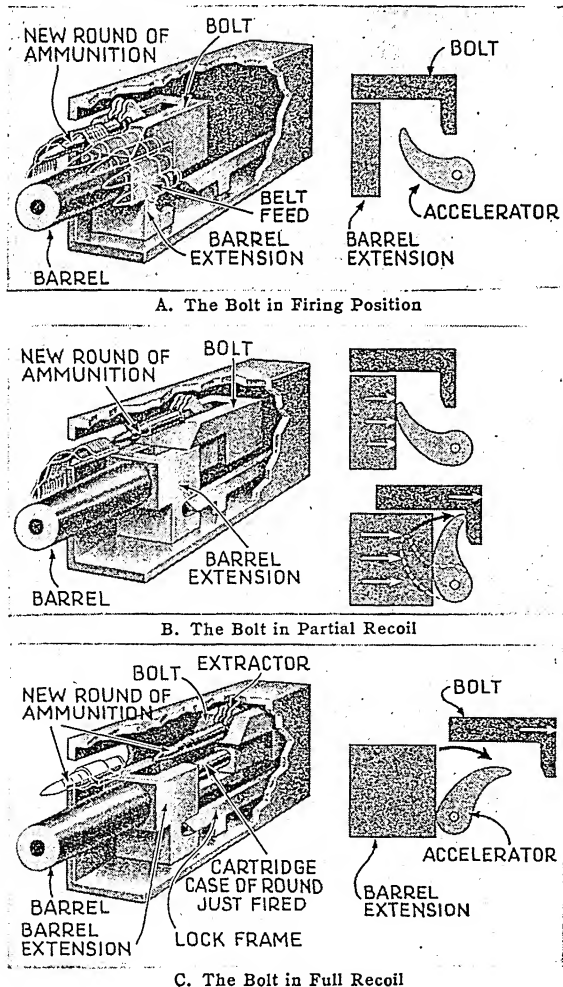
The Principal Working Parts of the Browning Machine Gun
